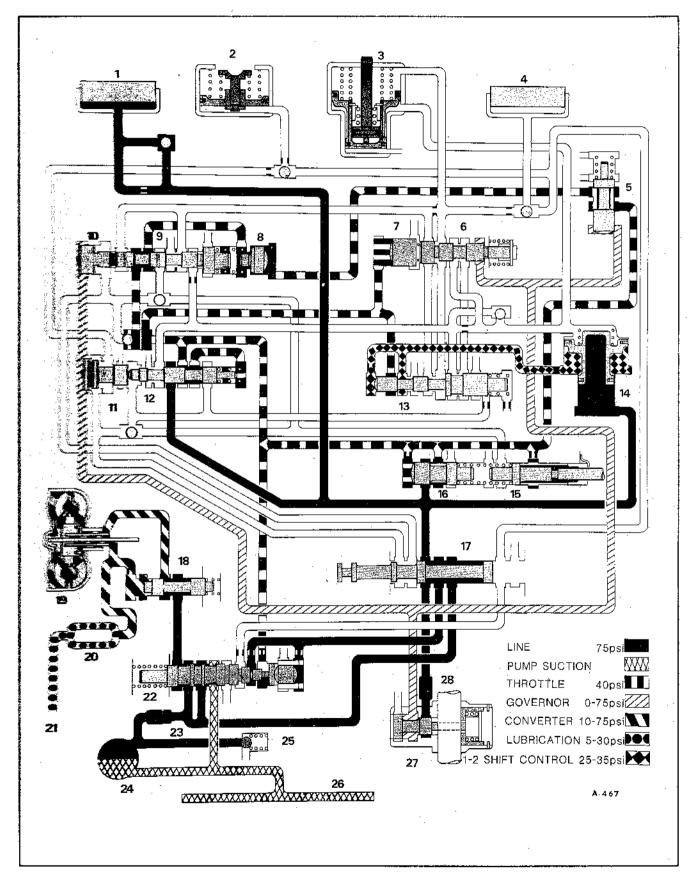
Drive - breakaway Selector lever in drive (breakaway) half throttle
